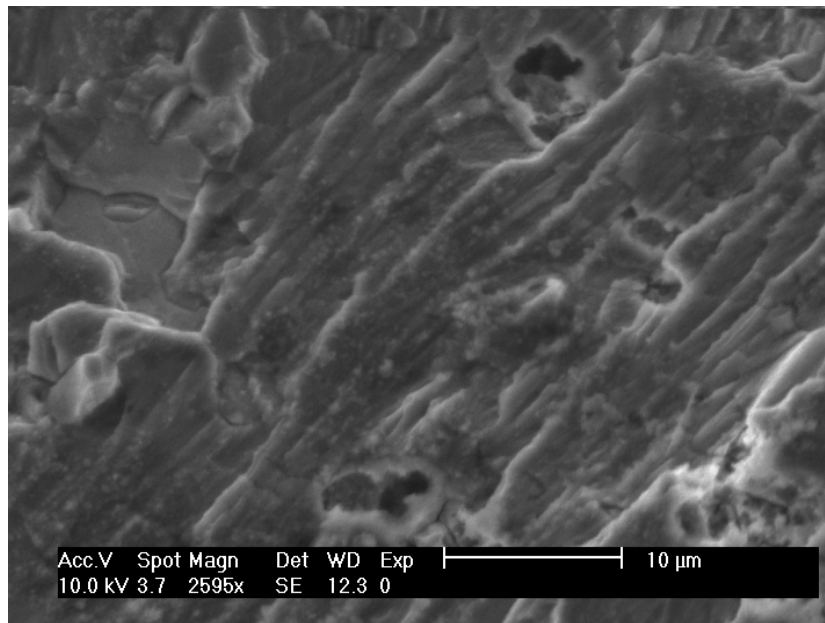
Fatigue cracks started from edges of fastening hole
